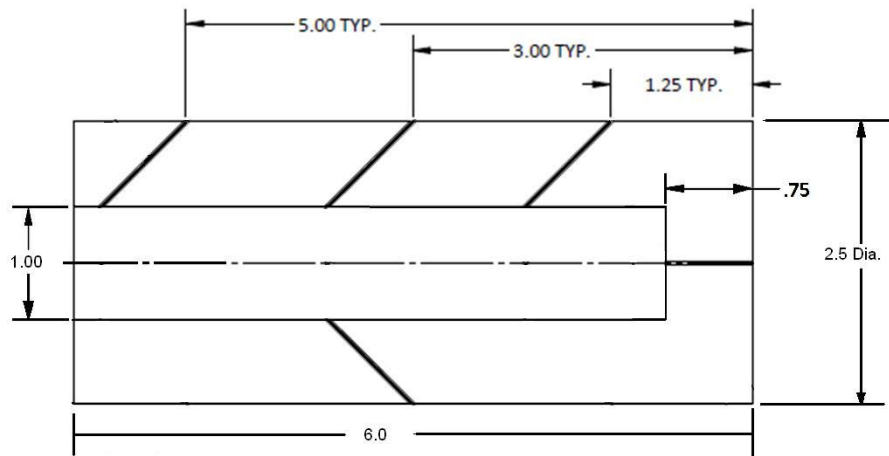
304 Stainless Steel quench probe body (dimensions are in inches).
